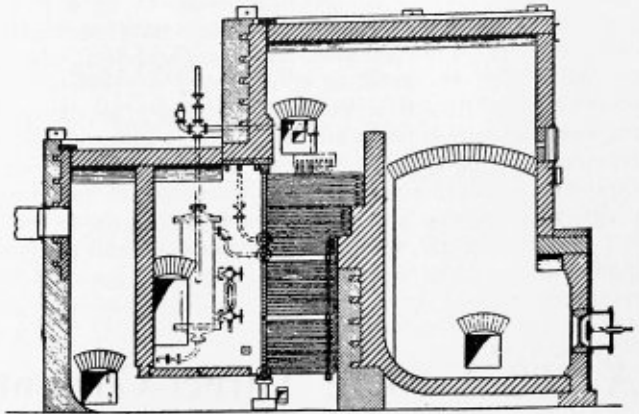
This boiler, upon which tests were made, has no drums but consists of the economizer part of the boiler shown in Fig. 1
